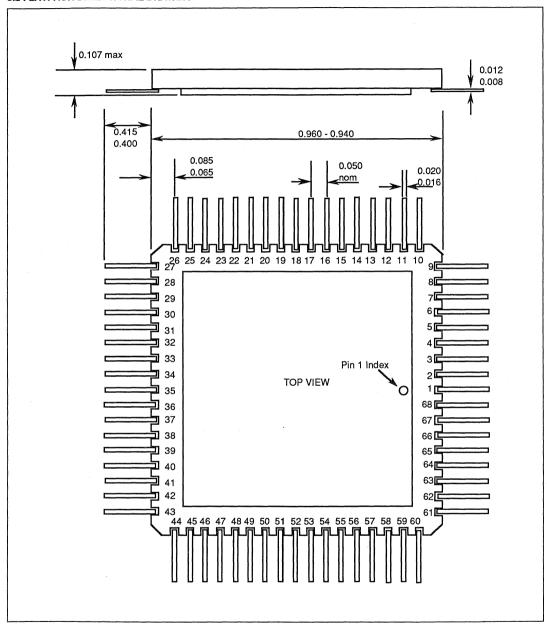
Dimensional Drawing of 68 Pin Lead Flatpack - Package Style F
